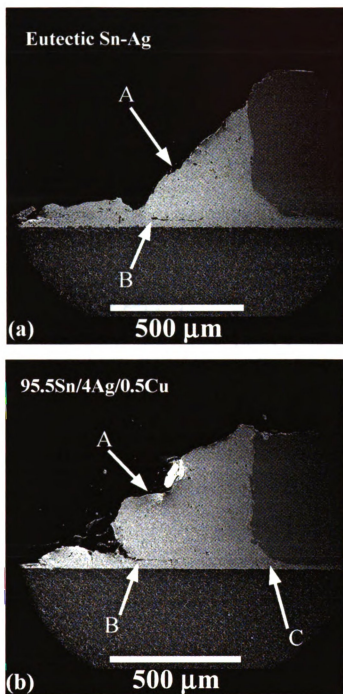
ESEM micrographs of cross-section of solder joint after 1000 thermal cycles. (a) is the eutectic Sn-Ag solder joint and (b) is the 95.5Sn/4Ag/0.5Cu solder joint.
